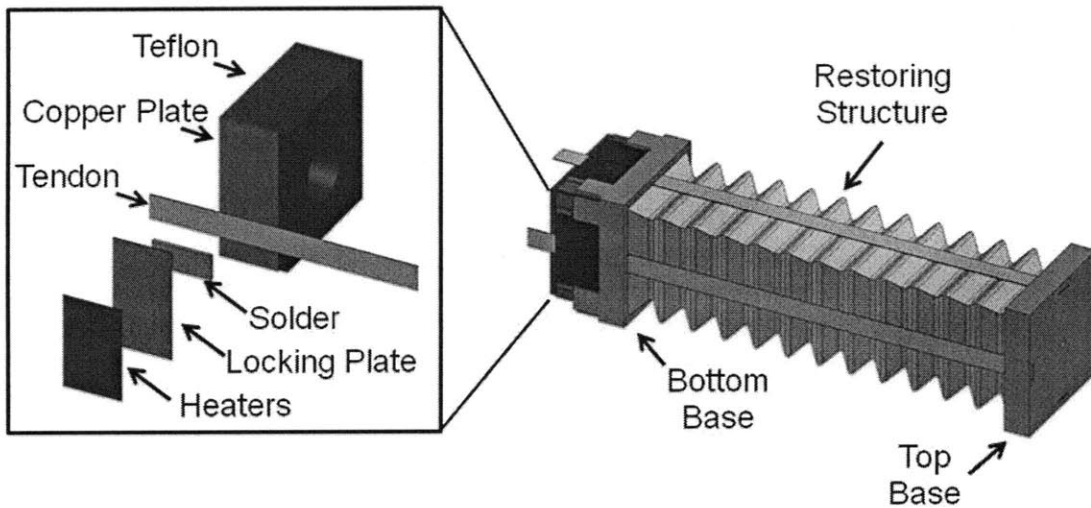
SquishTendons CAD model with labeled parts. Left Inset shows an exploded view of the locking mechanism.
